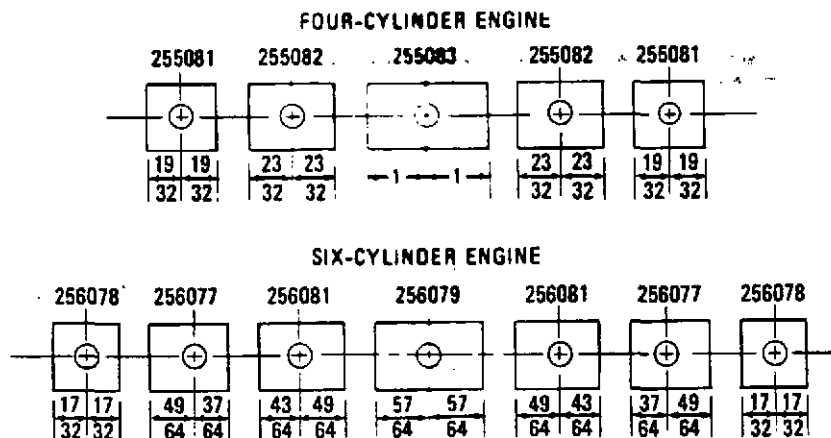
Rocker Arm Shaft Support Installation for Engines Having Variable Sized Supports
